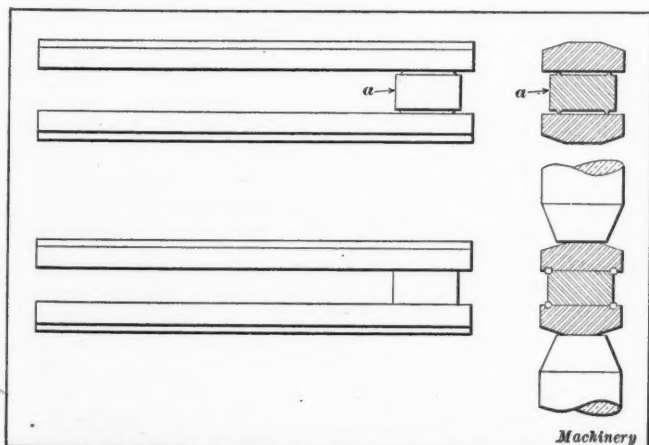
Diagram illustrating Principle applied in the spot-welding of Telephone Transmitter Magnet Bars without drawing the Temper
